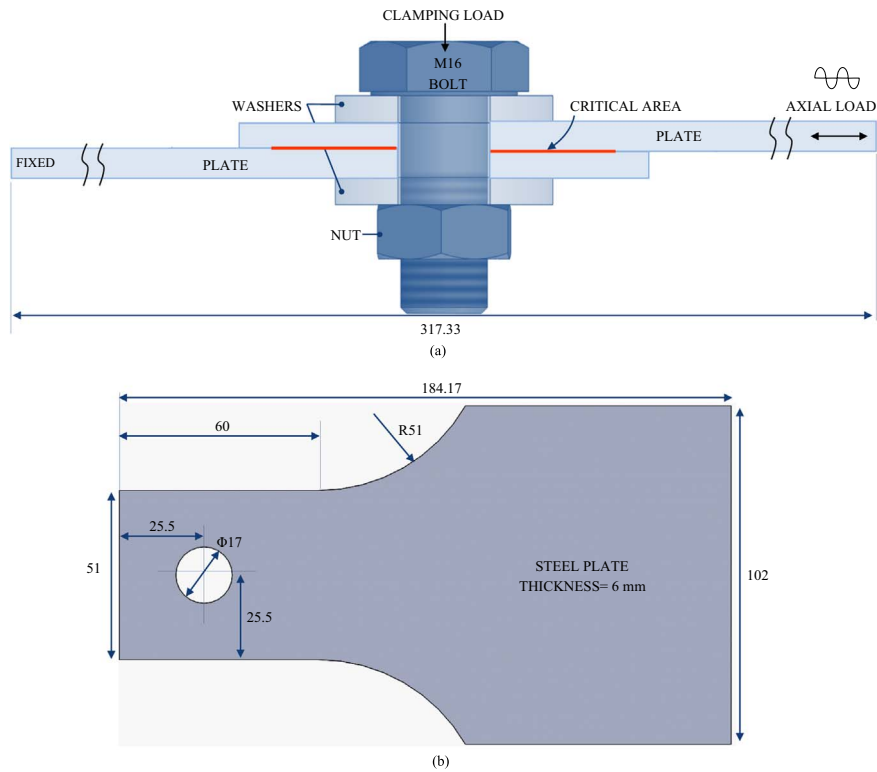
(a) Assembly view of the SLBJ specimen (b) Geometry of the dog-bone HSS specimen.
